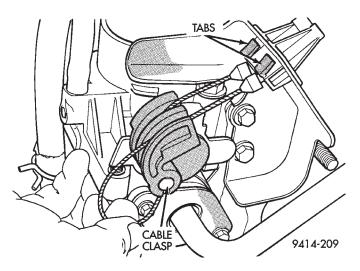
Disconnecting Throttle Cable—Typical REMOVAL
